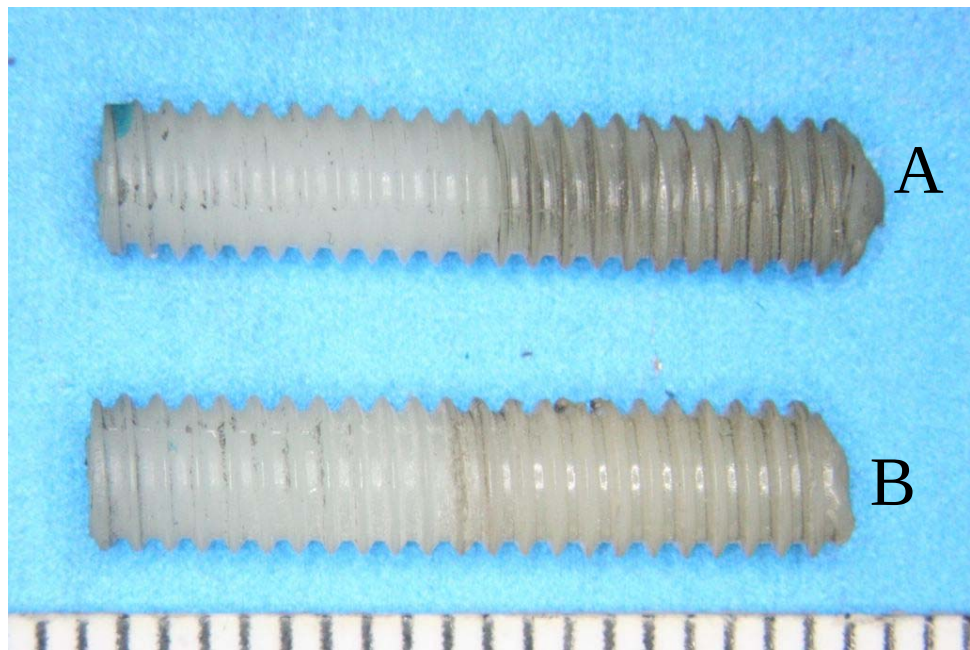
Conical fracture surface of nylon tension screw A
